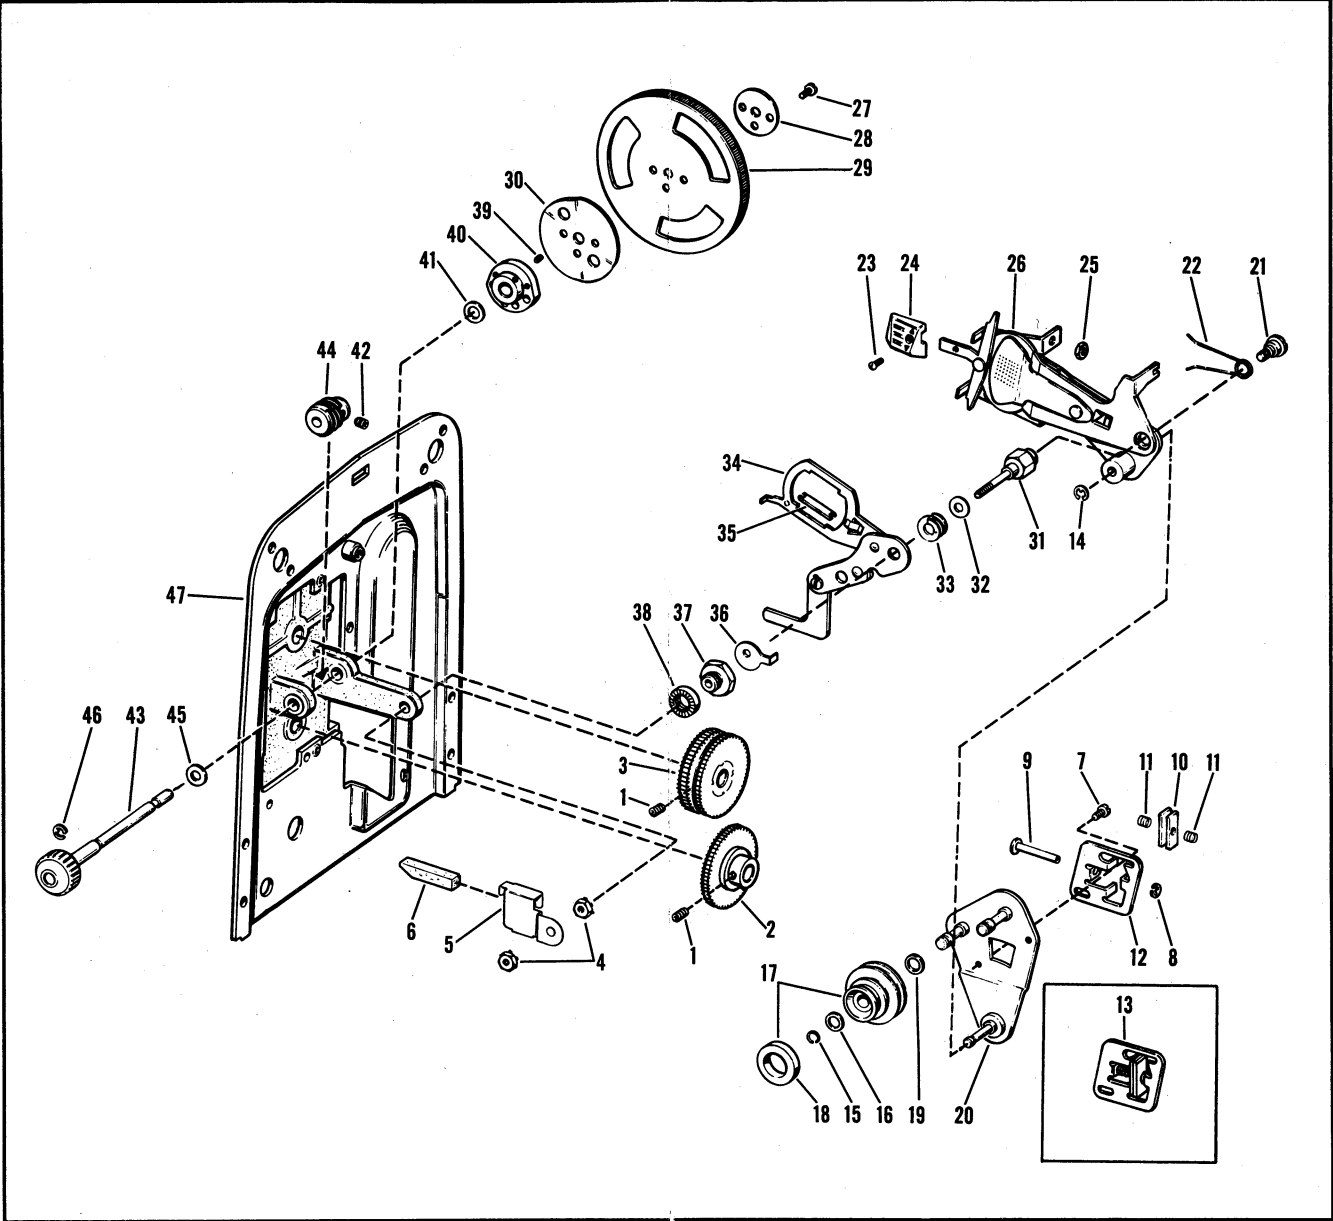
Shuttle and Gearing (Models 253BRX and 253RX)
